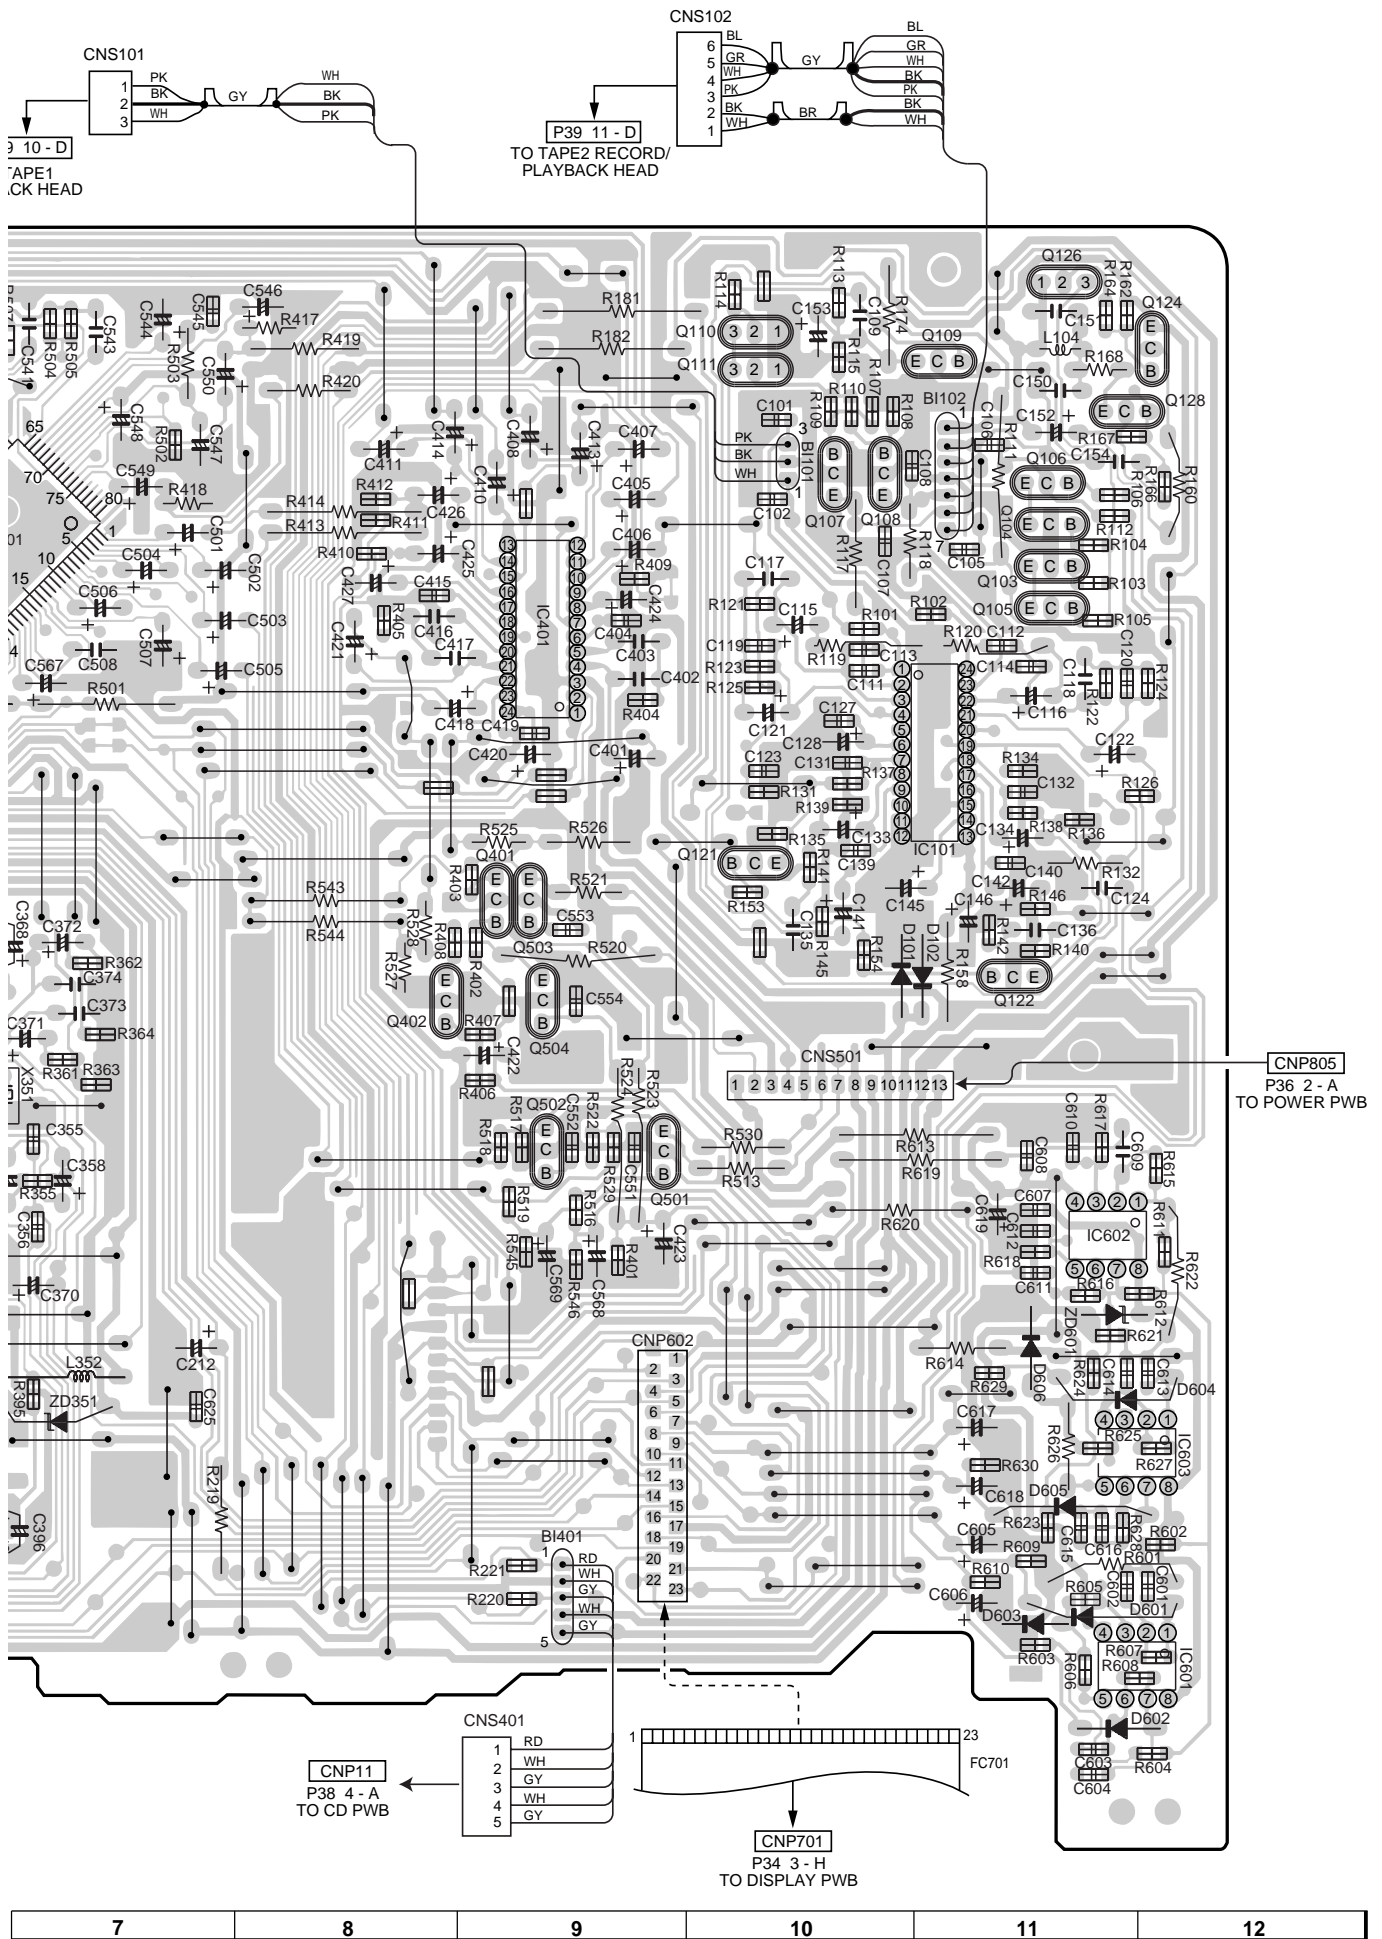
WIRING SIDE OF P.W.BOARD (2/8)
